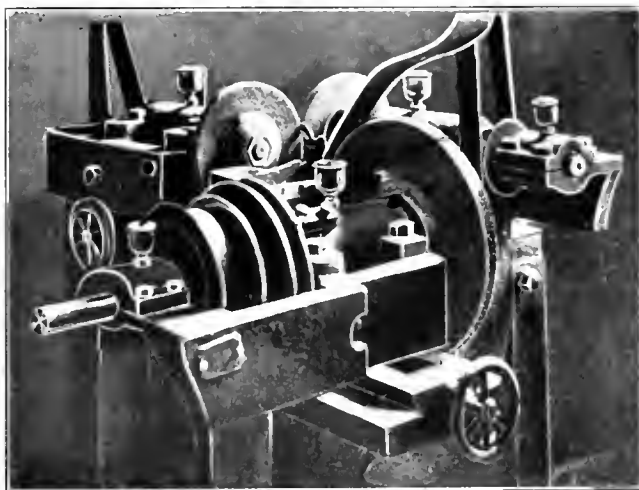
Special Three-wheel Grinder for Grinding the Teeth of Inserted Tooth Saws.
